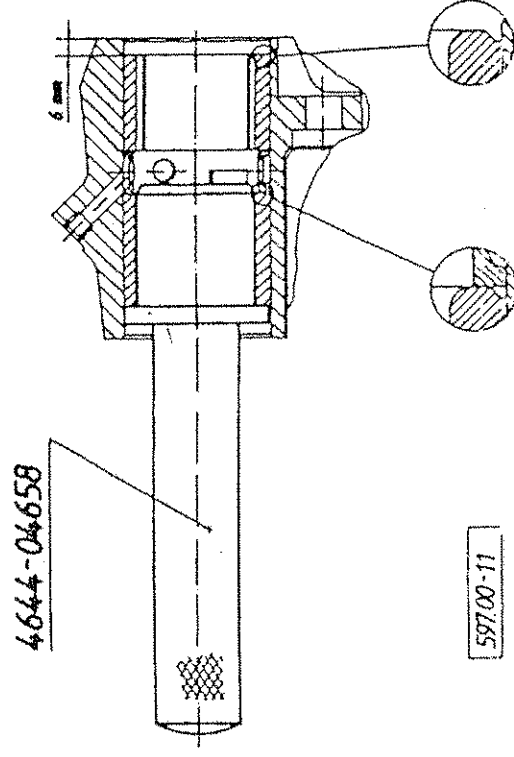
DRIVING IN THE BEARING BUSHINGS
